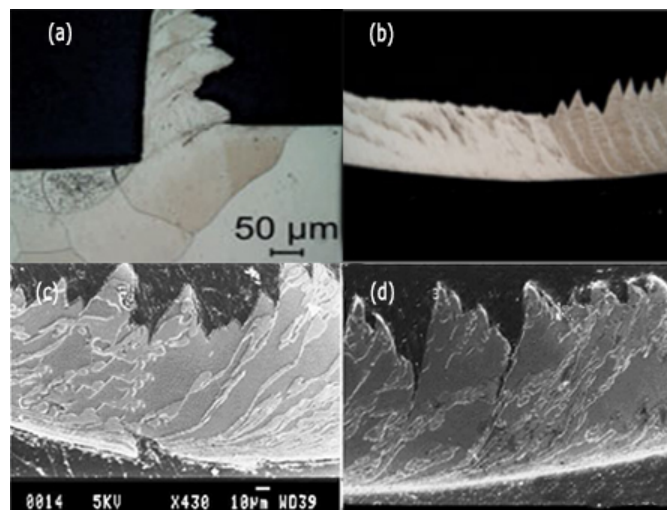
Examples of transversal sections of chips formed when machining Fe₃Al. Source: adapted from [84] and [134]
